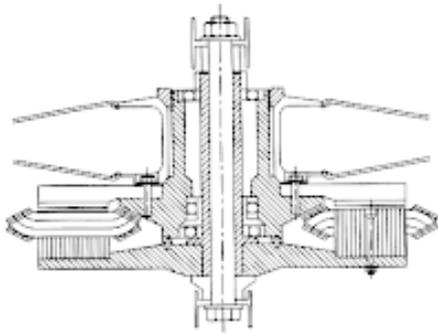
Disc-rotor motor fitted to spoked wheel of an electric car [19]
